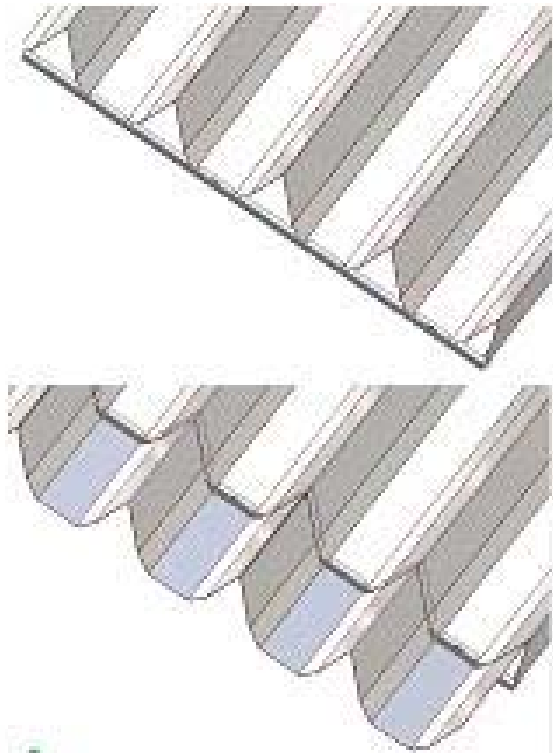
TOP The mirror array is mounted with screws through end brackets attaching it to the frame. BOTTOM Mirror extenders can be added at South end of a row of modules mounted on horizontal beam trackers.
